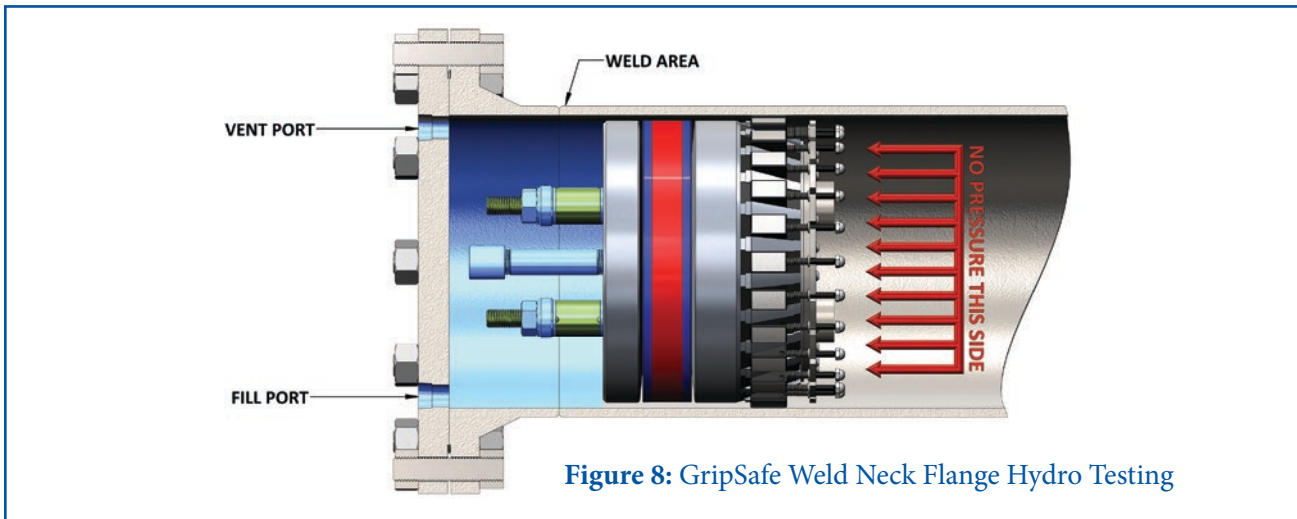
GripSafe Weld Neck Flange Hydro Testing
